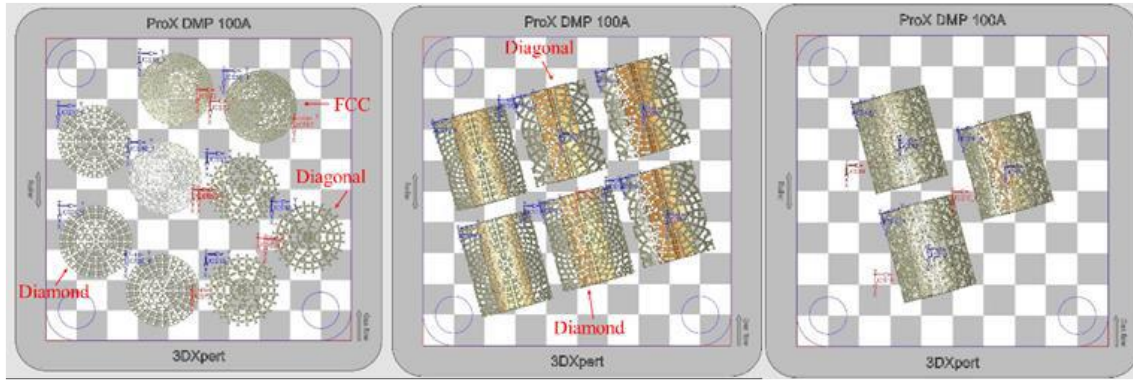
Building plates design in 3DXpert. The direction of the roller is up-down.
